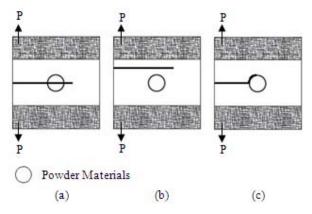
Failure mode in adhesive joint mixed with fillers of T-peel joint test. (a) Powder fracture, (b) Normal fracture, and (c) Adhesive fracture.
